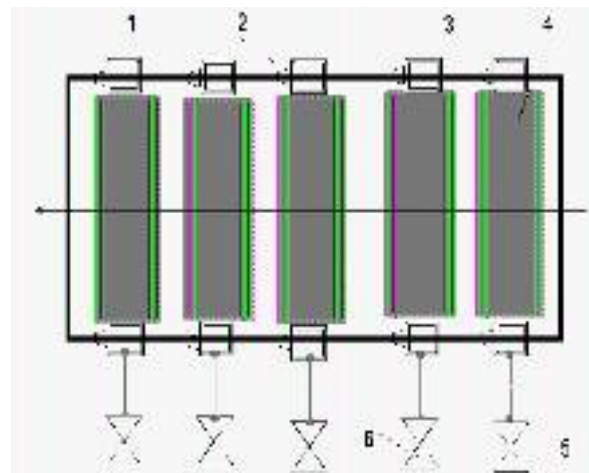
Measurement vibration system on the mill stand: 1. Rolling mill frame; 2. Accelerometer; 3. Backup roll; 4. Mill roll; 5. Coupling bar; 6. Engine.
